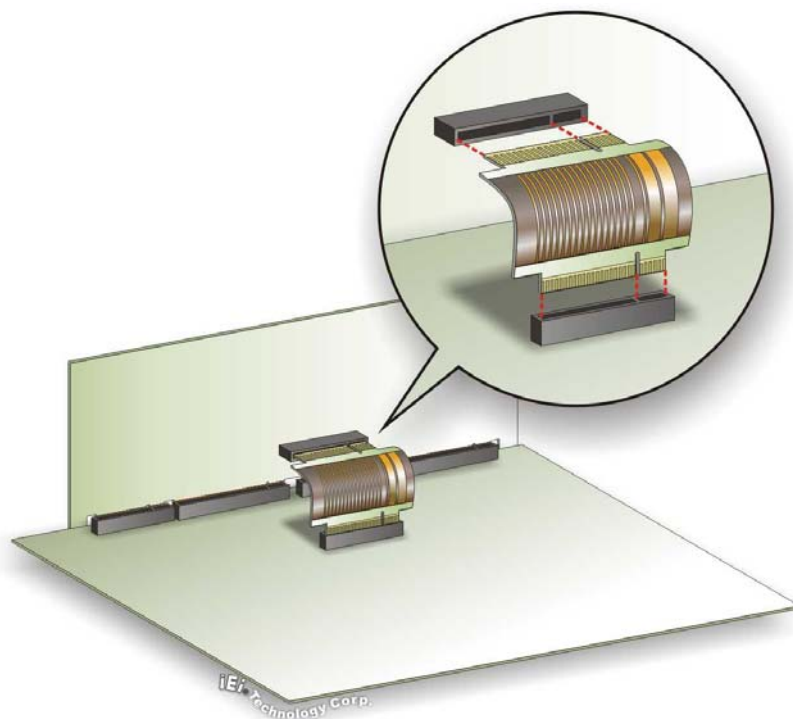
PCIe x8 Board-to-Board Connector Installation
